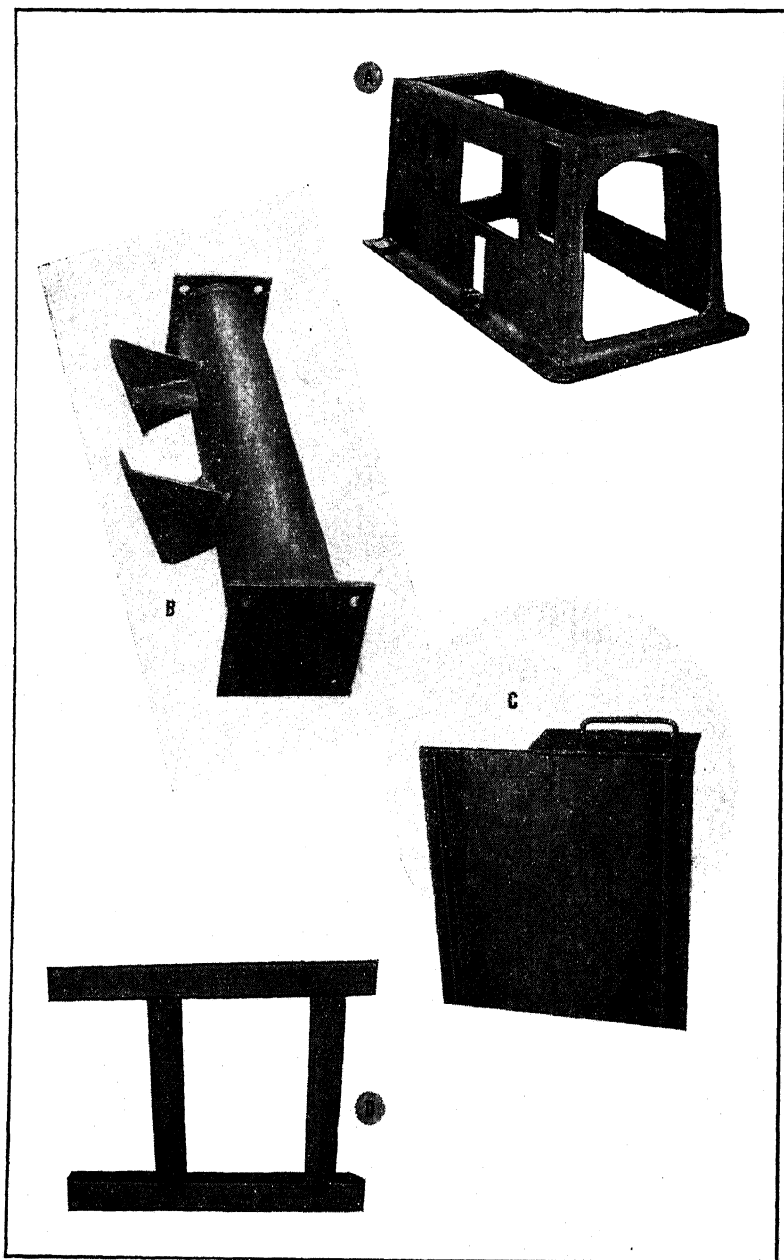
BASES—(A) Sub-base for machine tool. (B) Tandem drive gearbox support. (C) Roller table for band saw. (D) Engine base for small machine.
